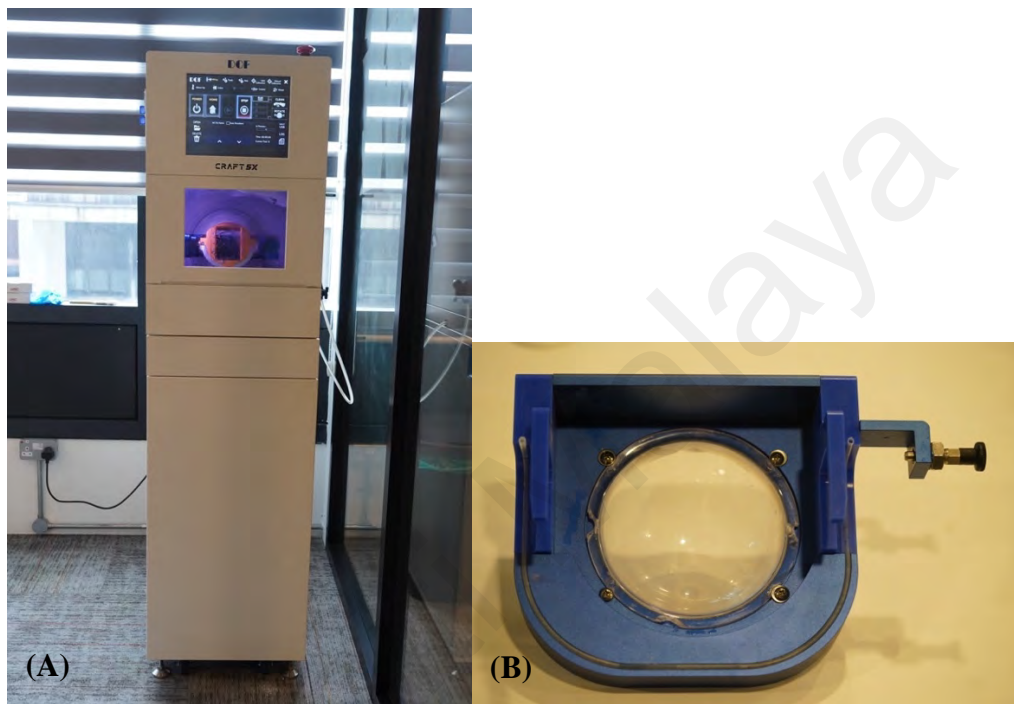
(A) CRAFT 5X milling machine; (B) Detachable submerged milling tank
